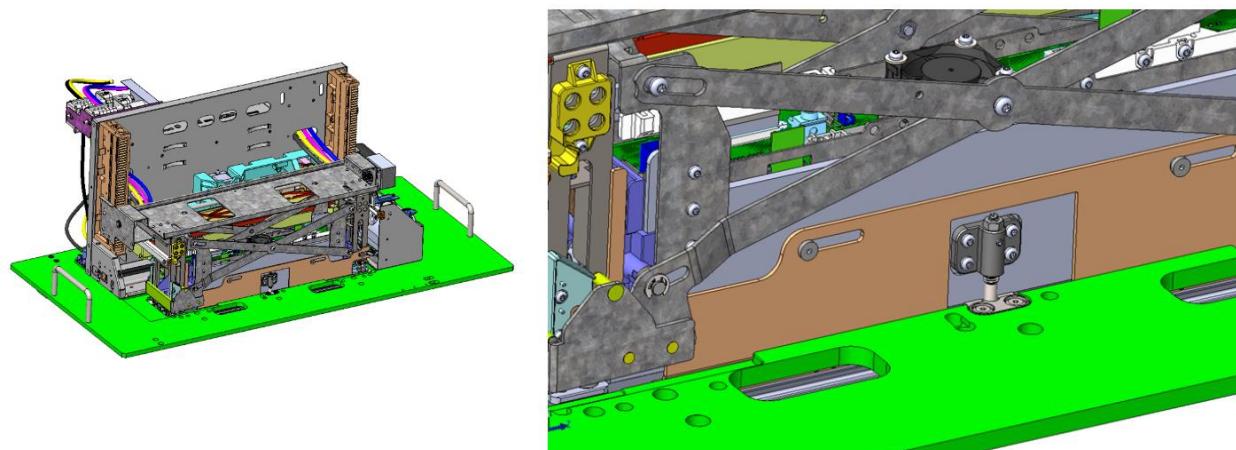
Datum Pins on Datum Plates (PRINT Position Shown)
